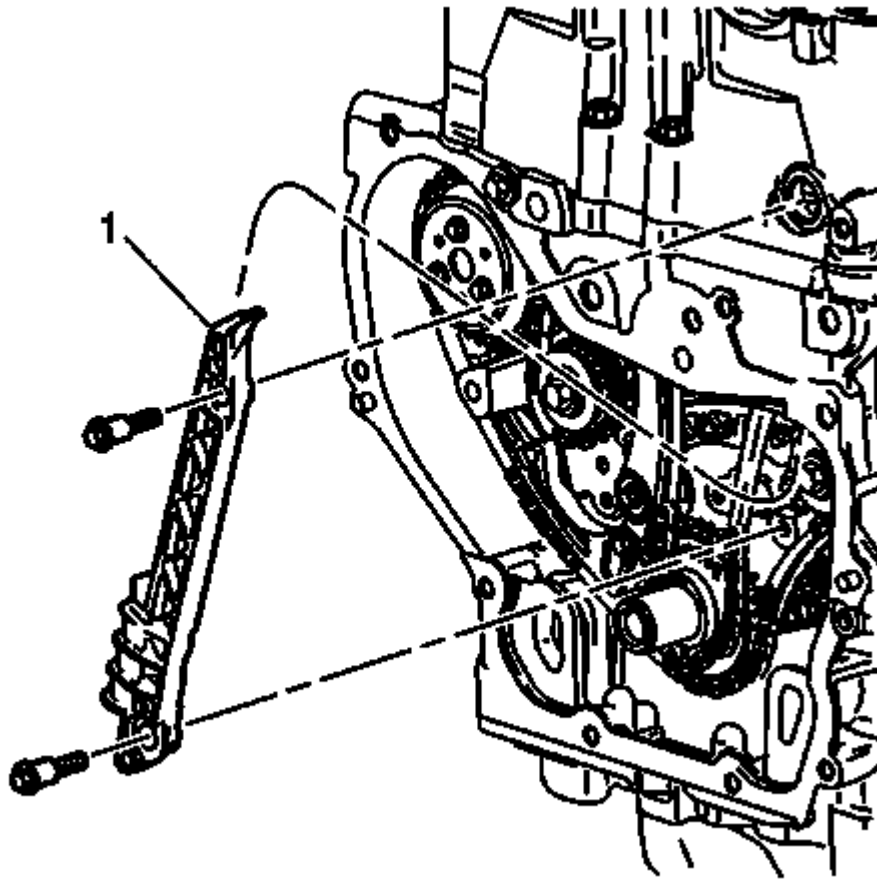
View of Adjustable Timing Chain Guide Bolt.
